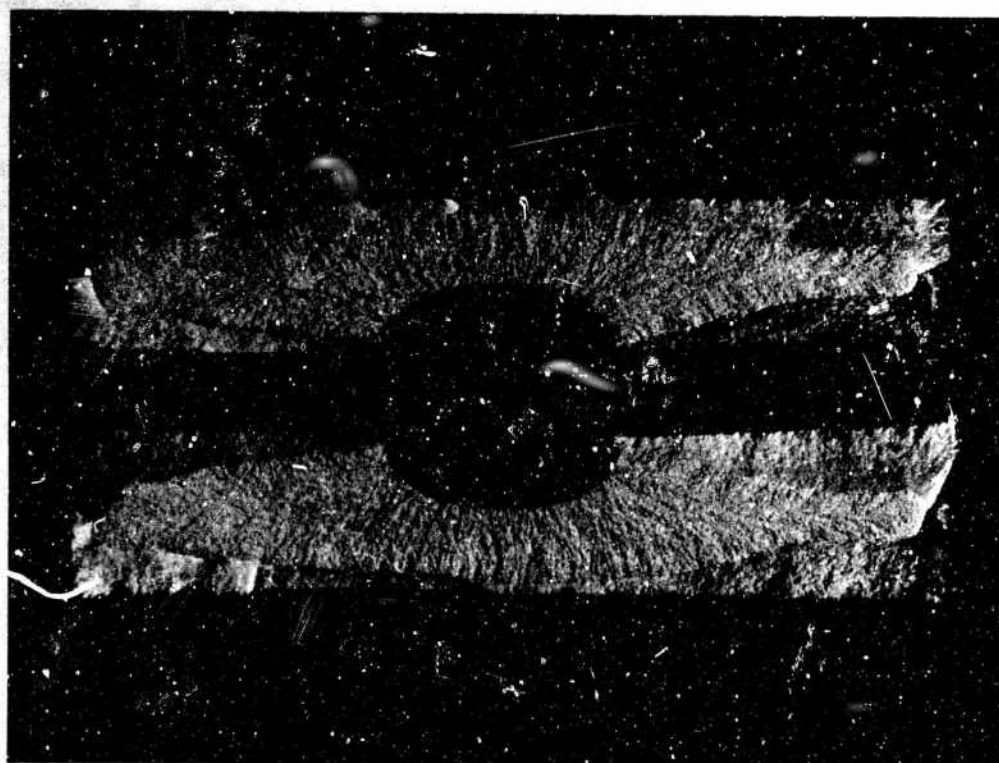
Typical Surface Cracks in 6Al-4V Titanium Fracture Testing
